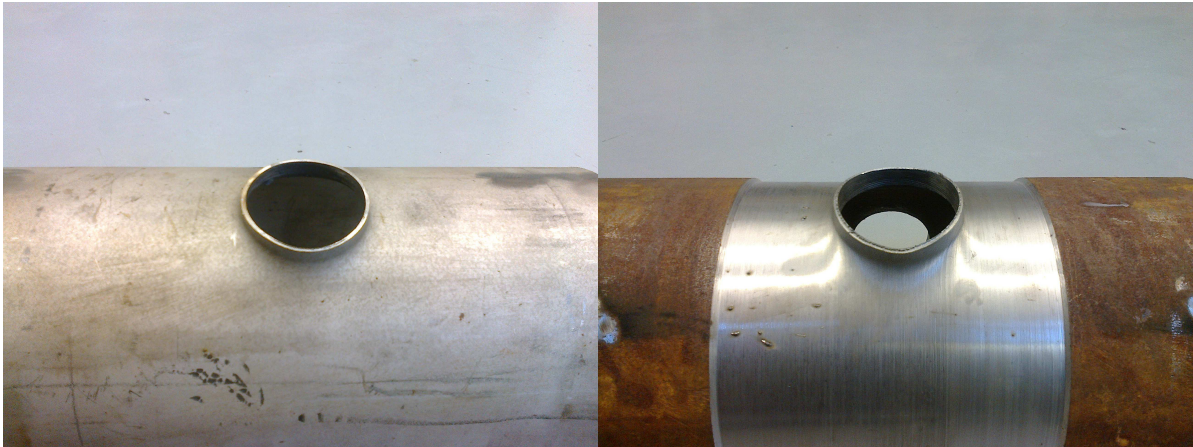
Flanges of 50 mm formed on 150 mm diameter tubes (new inox steel tube – left and used carbon steel tube - right)
